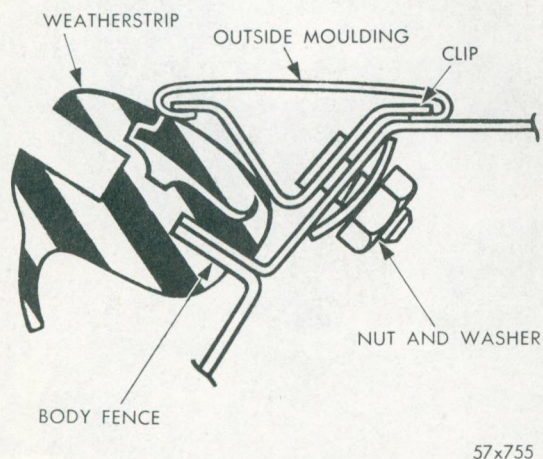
Upper Rear Window Weatherstrip and Moulding
